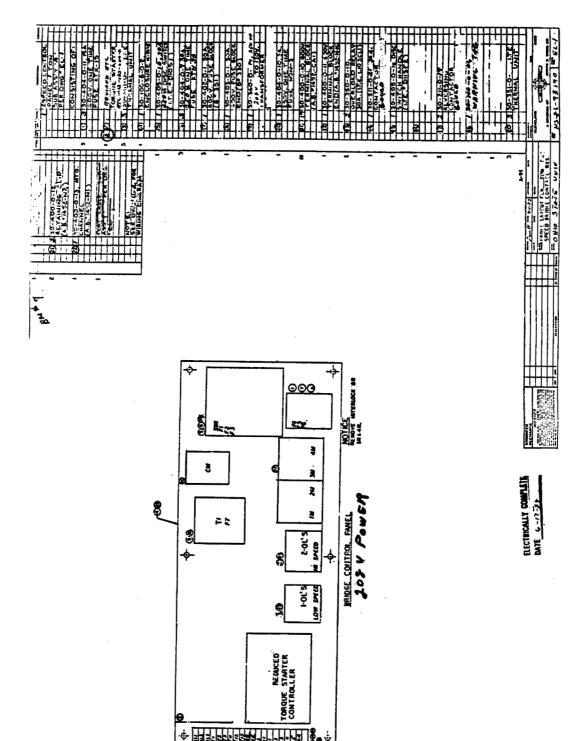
Underhung bridge crane schematic, panel layout, existing.
